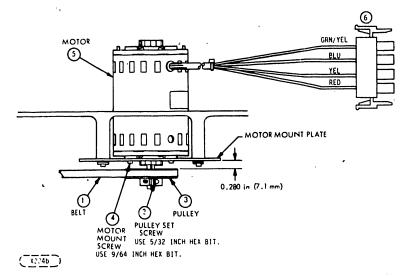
DRIVE MOTOR ASSEMBLY
